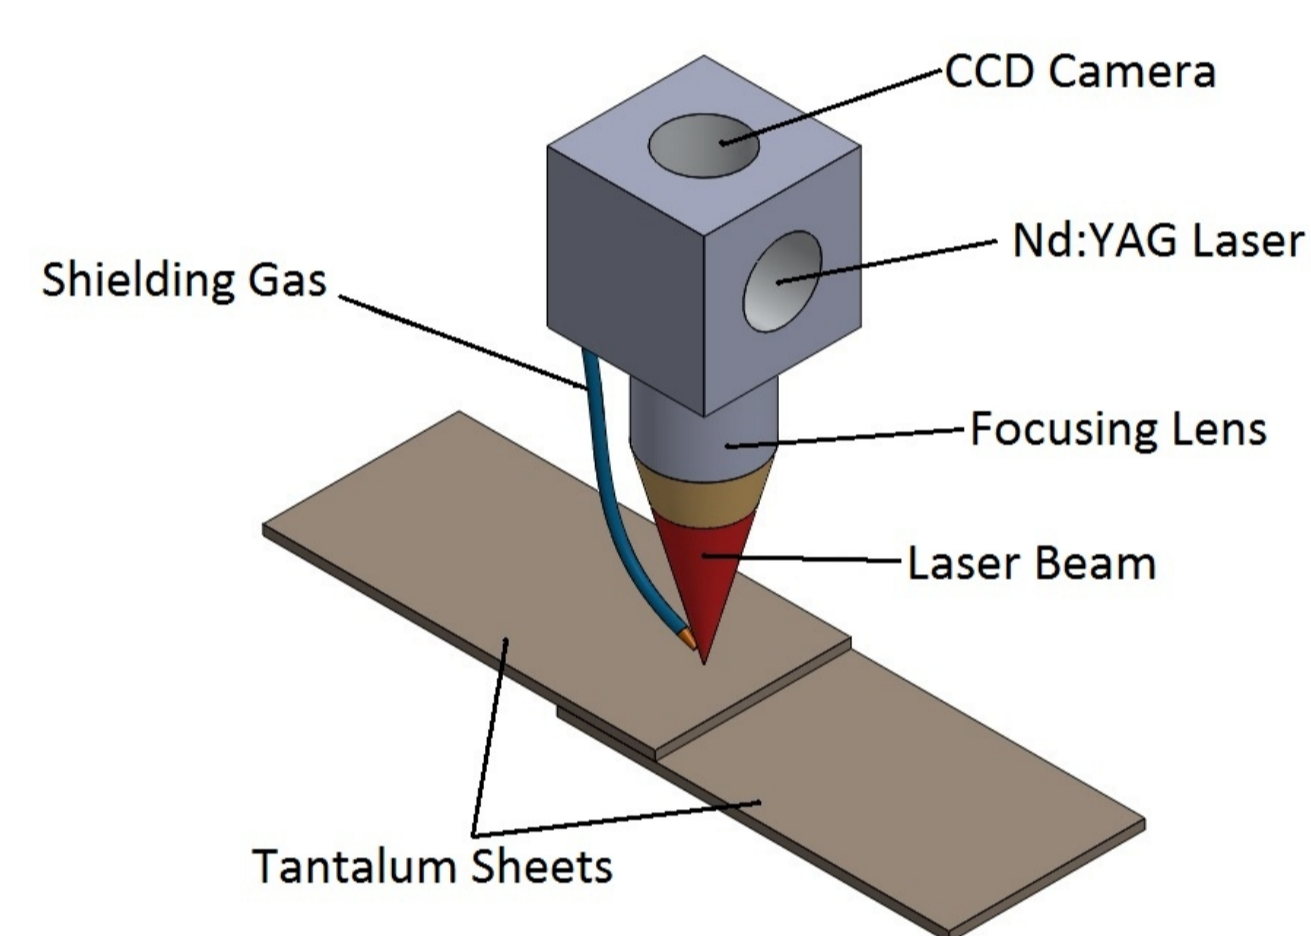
schematic diagram of Nd:YAG pulsed laser welding system.
